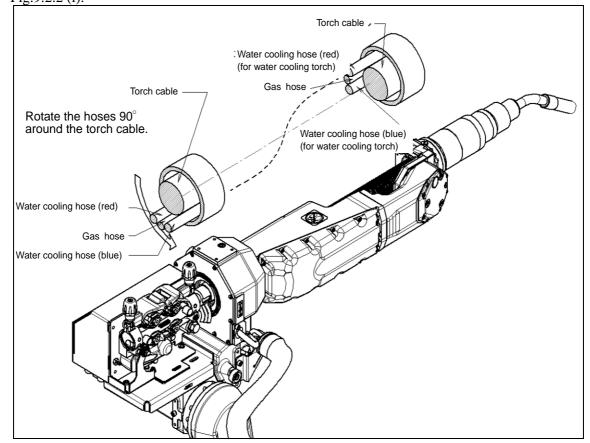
(h) Arrangement of the cables and hoses
